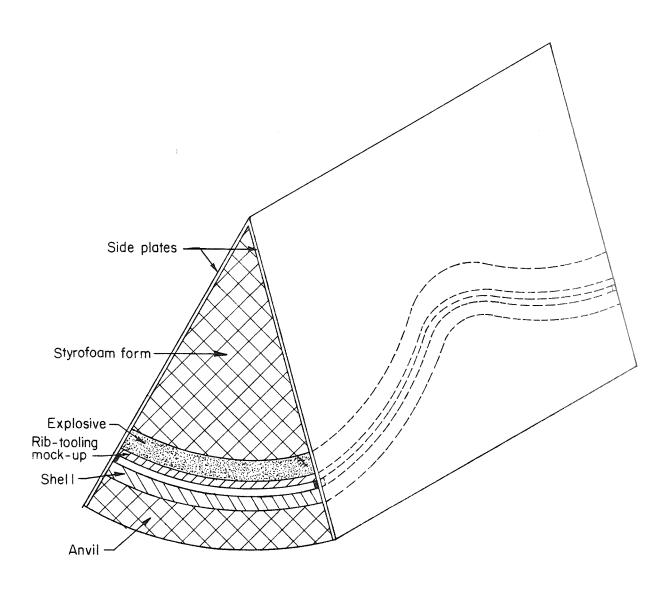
ARRANGEMENT USED FOR EXPLOSIVELY WELDING STAINLESS STEEL NOZZLE SEGMENT COMPONENTS -RIB TOOLING MOCK-UP TO SHELL
